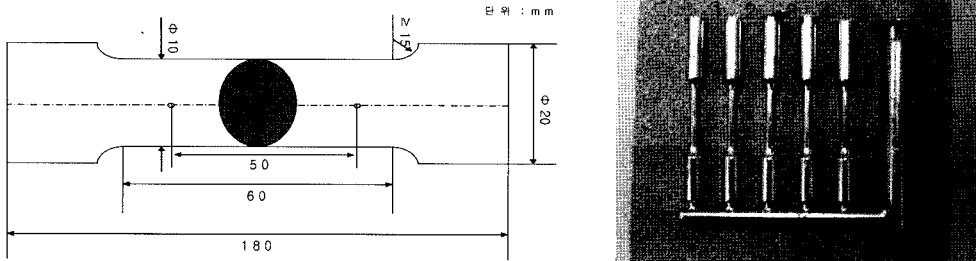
The Geometry of tensile specimen and the casted solder material.
